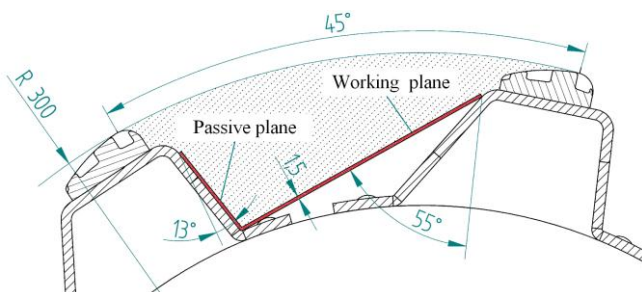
Spaces between threshing cylinder rasp bars covered by filler plates I
